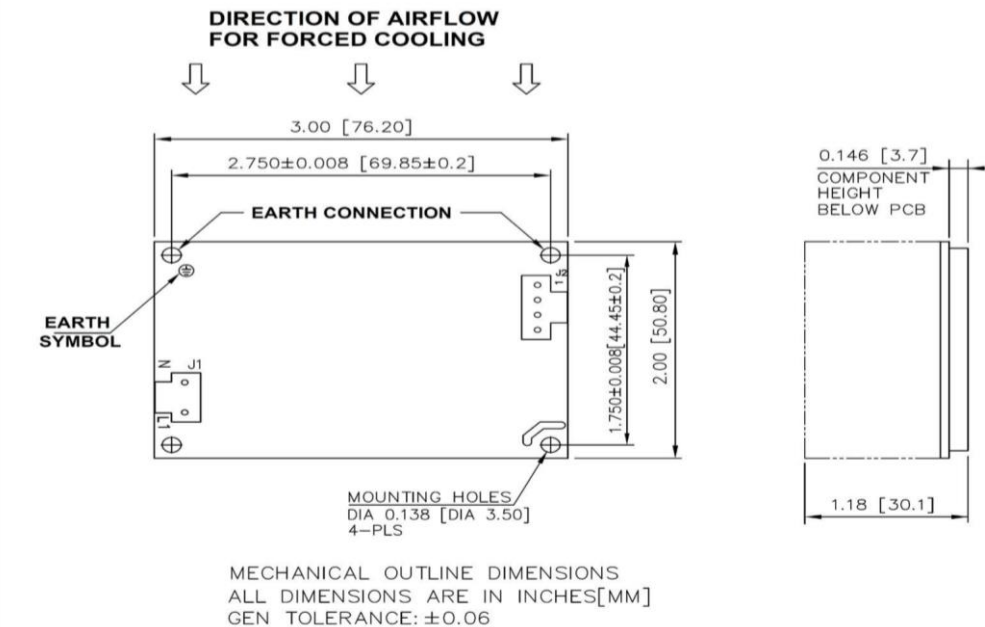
Mechanical Drawing - Molex Header (Option 2)
